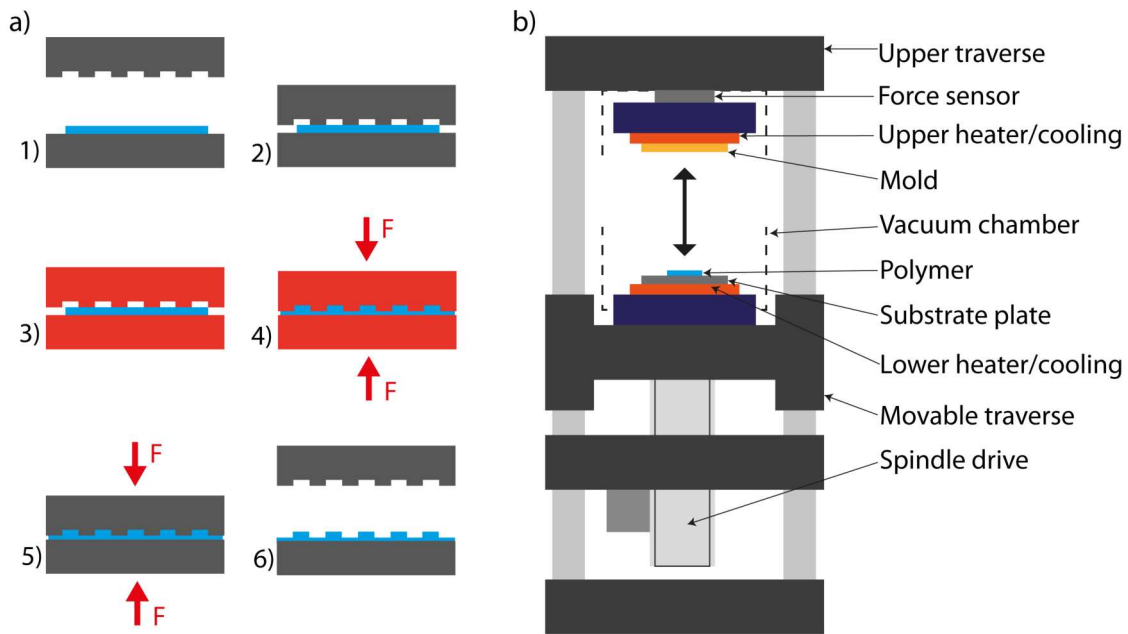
a) Basic steps of the hot embossing process. The polymer is heated to the appropriate moulding temperature, then embossed and cooled back down while still under pressure. b) Schematic of a hot embossing machine.
